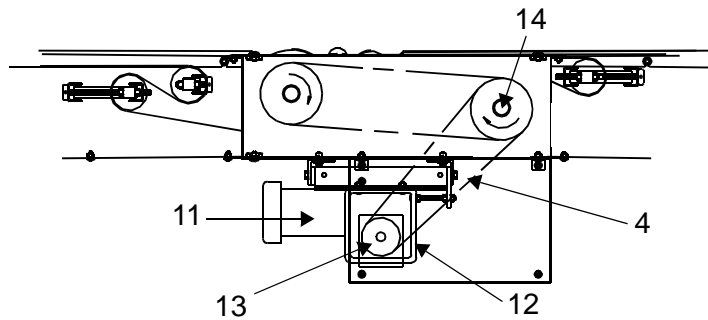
Power Unit - Underhung Mount (UH) RH Assembly Shown
